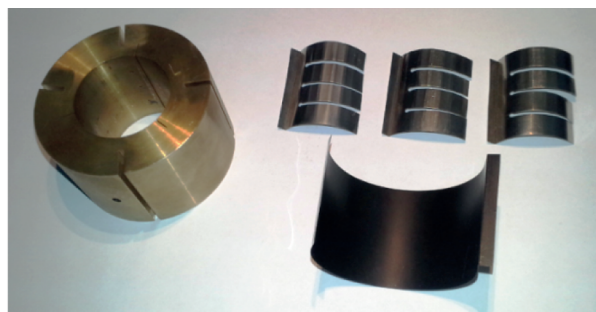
Bearing components (the bush and the foils) prepared for assembly
